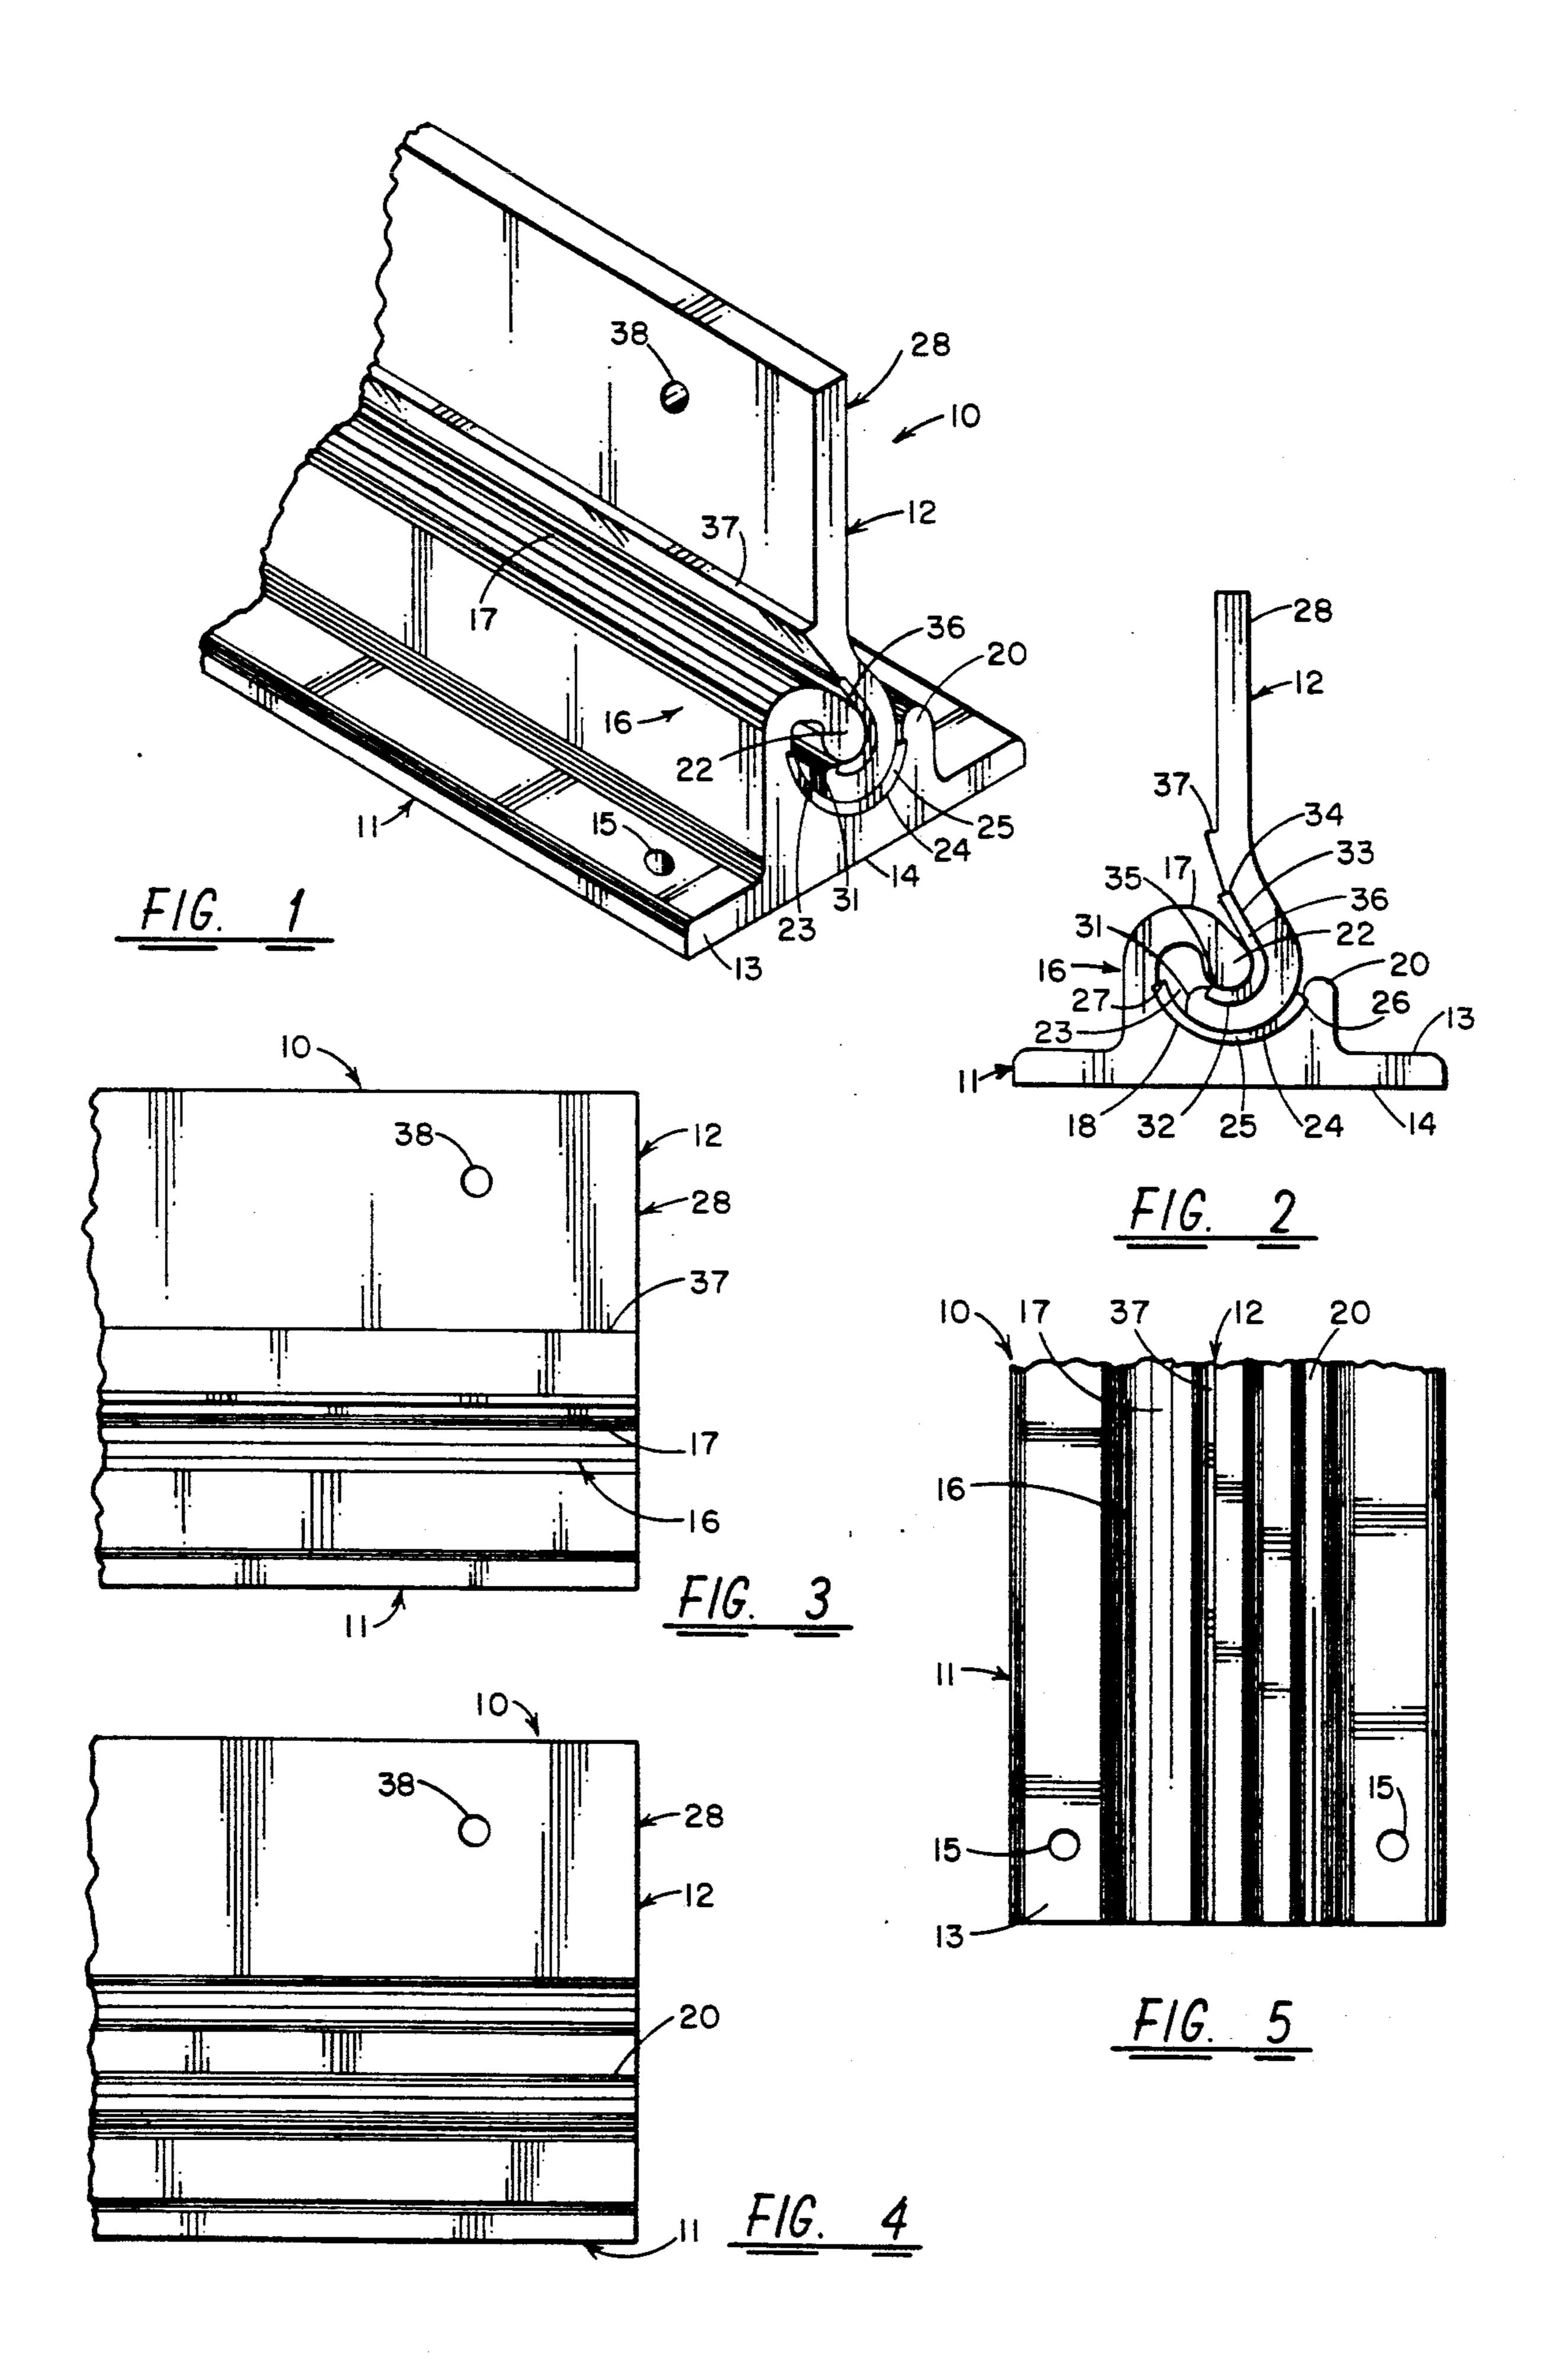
is a partial perspective view of a hinged mounting bracket in accordance with the present invention;
